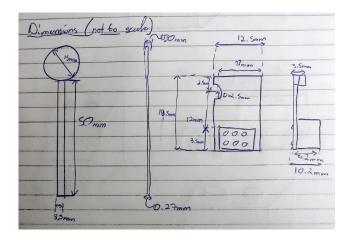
Initial measurements and sketches of a SingleTact Sensor
